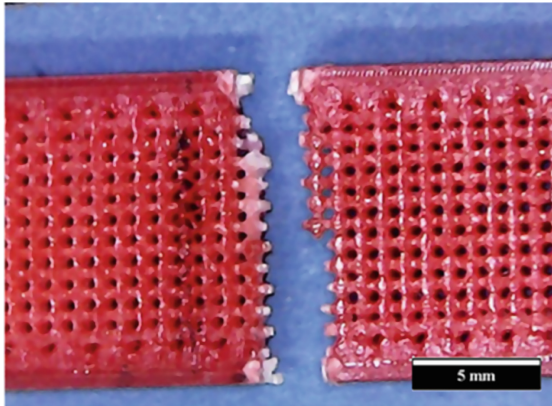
Fracture in the test specimen with infill pattern type rectilinear
